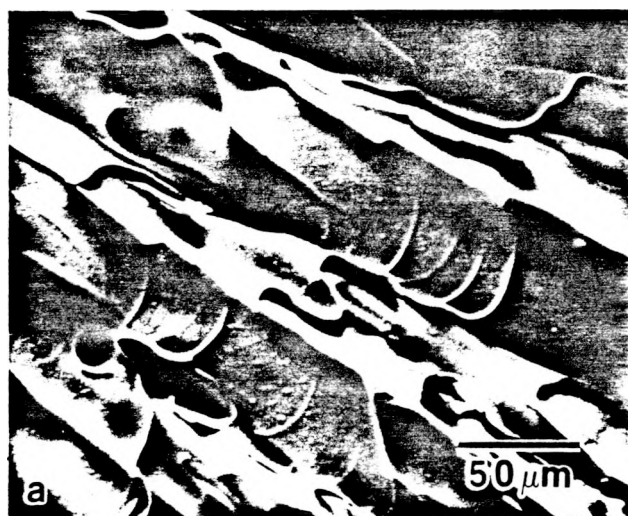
SEM micrographs of surface of weld centerline crack in boron doped arc cast molybdenum weld (32).
